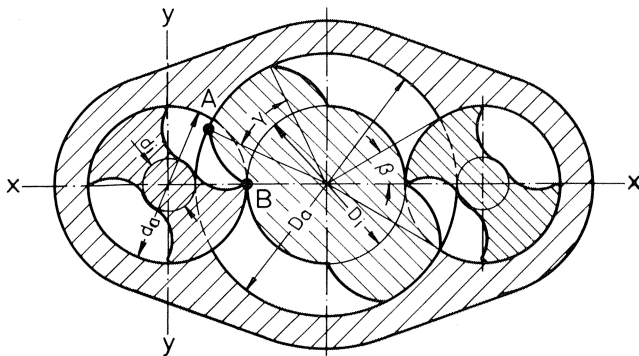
Cross-Sectional Profile of a Three-Screw Pump.
